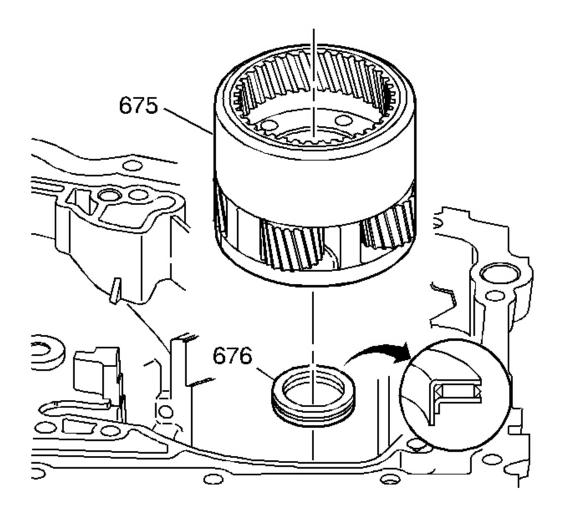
Identifying Reaction Carrier/Sun Gear Thrust Bearing Courtesy of GENERAL MOTORS CORP.
